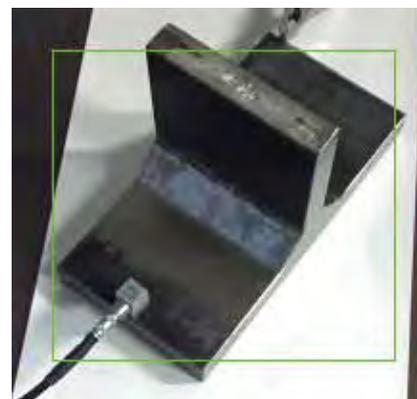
T-shaped welded joint (defect in welded corner part)
